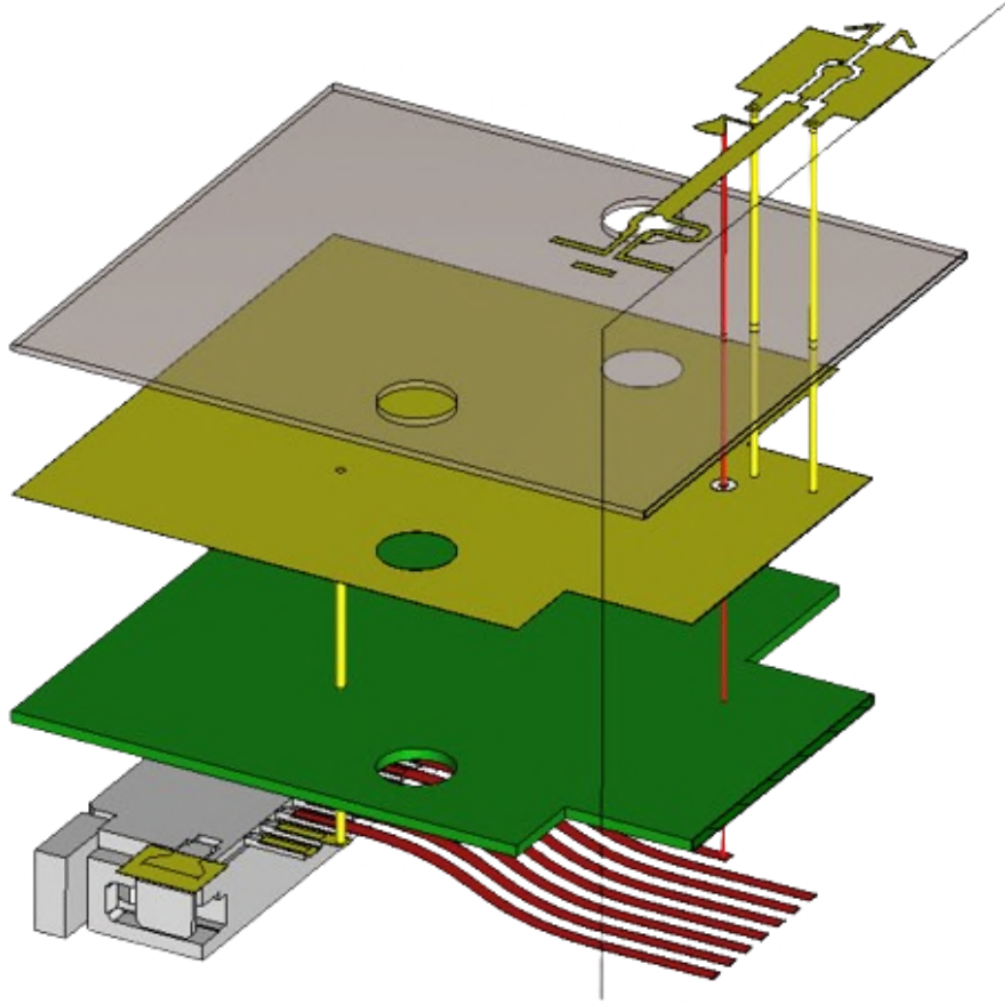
Exploded view of the multilayer assembly showing the vertical interconnections and DC routing between layers.
